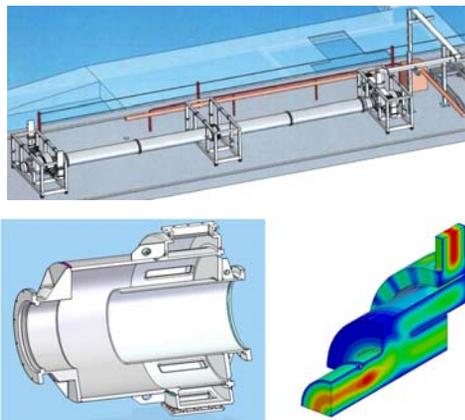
Top: Layout of the KCS test bed, bottom: CTO cross section and electric field pattern.
